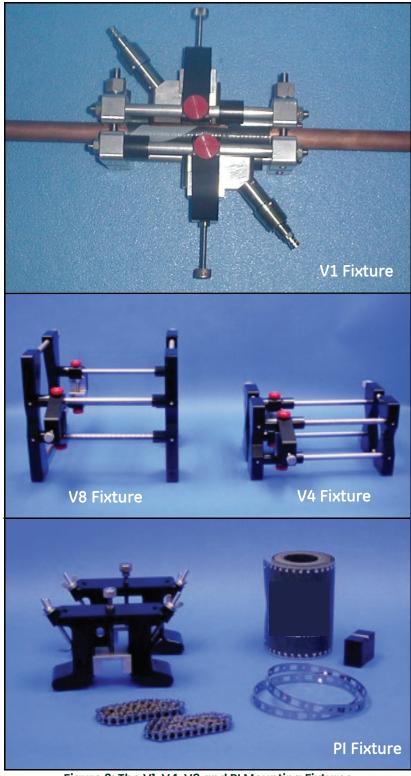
The V1, V4, V8 and PI Mounting Fixtures
